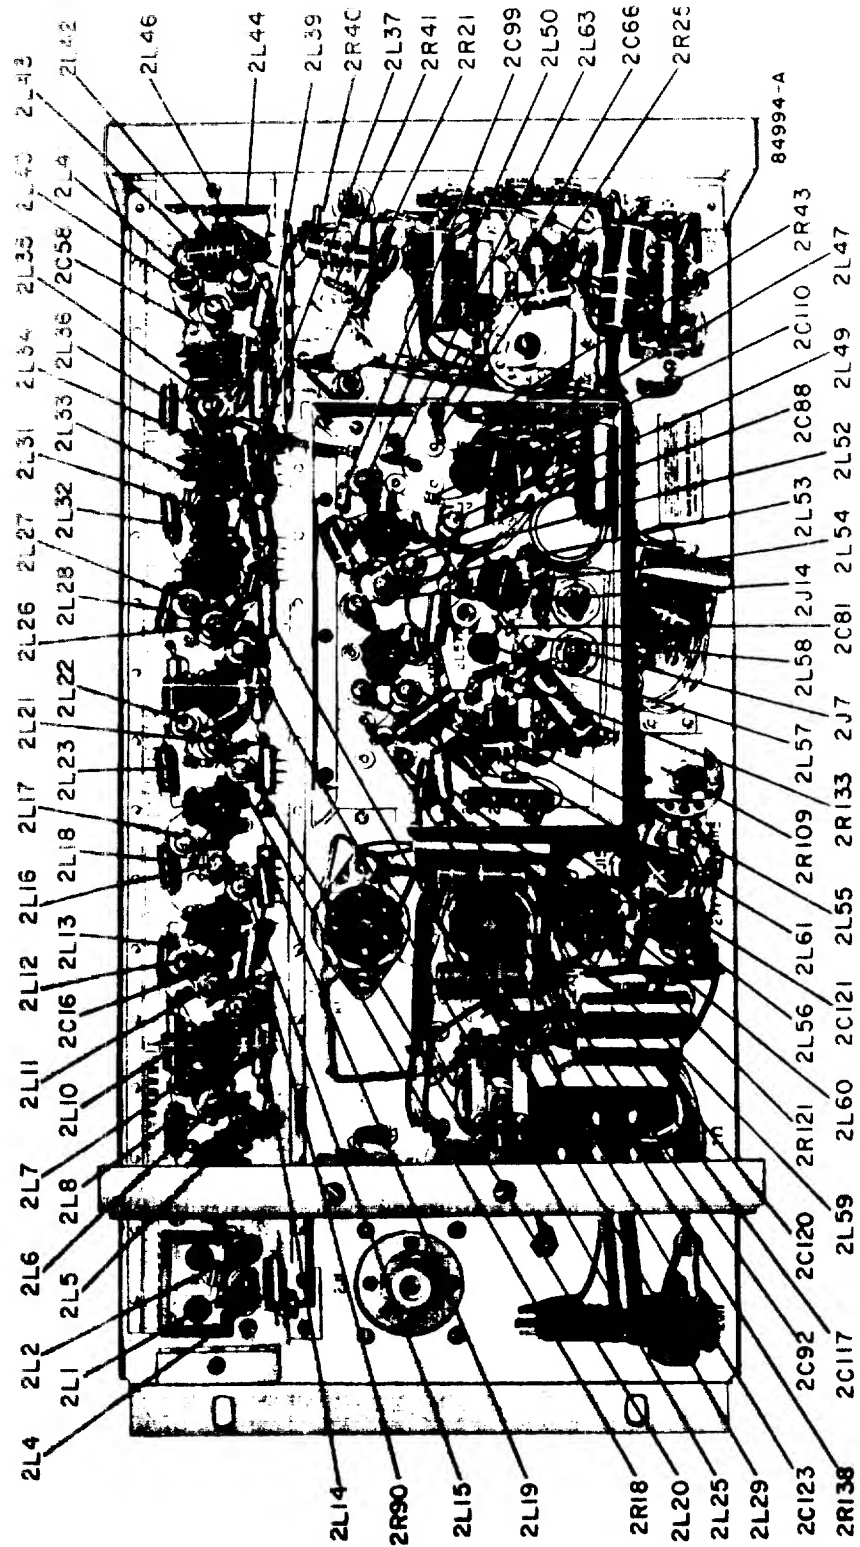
Receiver/Modulator—Rear View, Dust Cover and Shield Covers Removed
